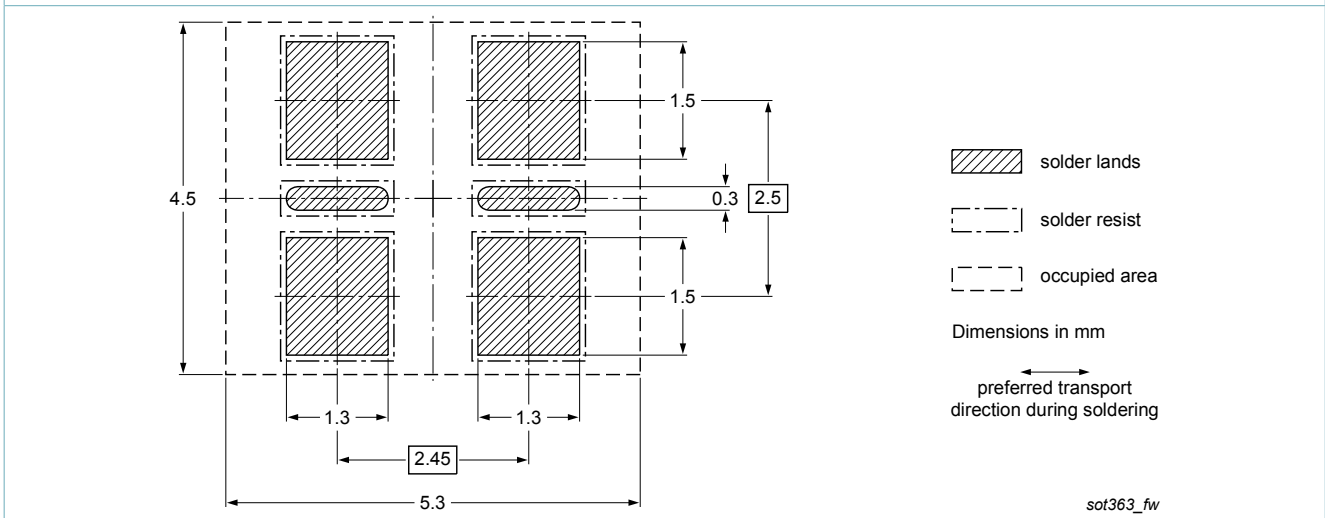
Wave soldering footprint for SOT363 (TSSOP6)
